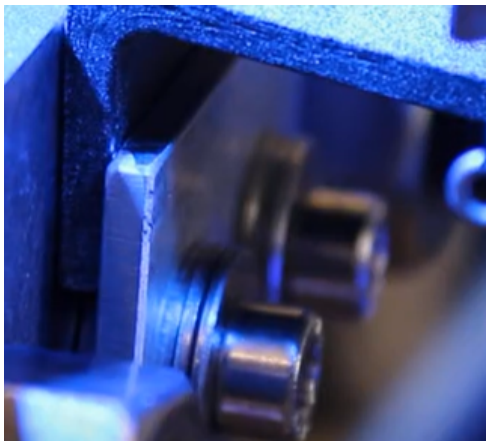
The first clamping method, the bolts are placed below the sample which induced a bending moment when testing.
